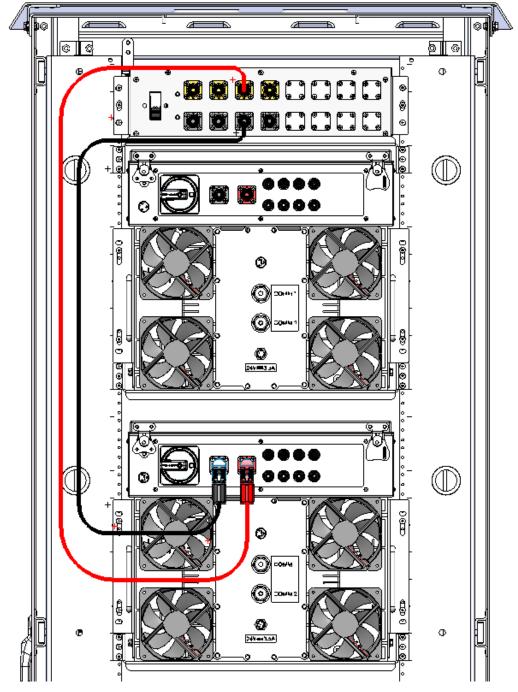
SURLOK CABLING ROUTED TO PRIMARY (INPUT) FEED #2
